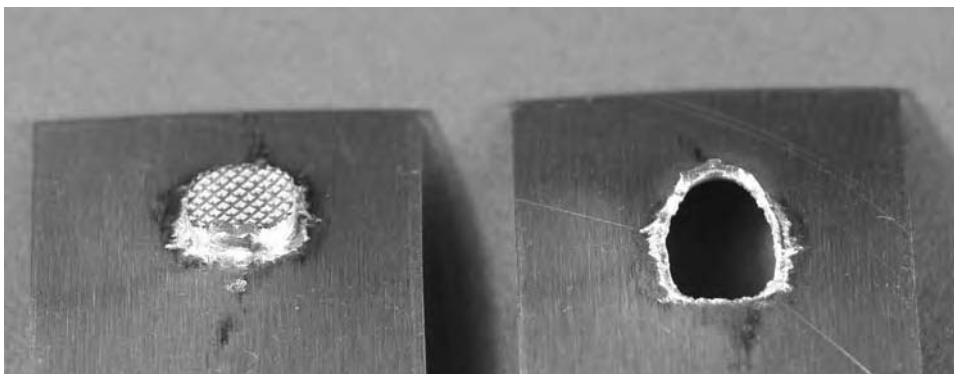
Lap shear coupon after tensile shear testing, showing nugget tearout indicative of a good weld
